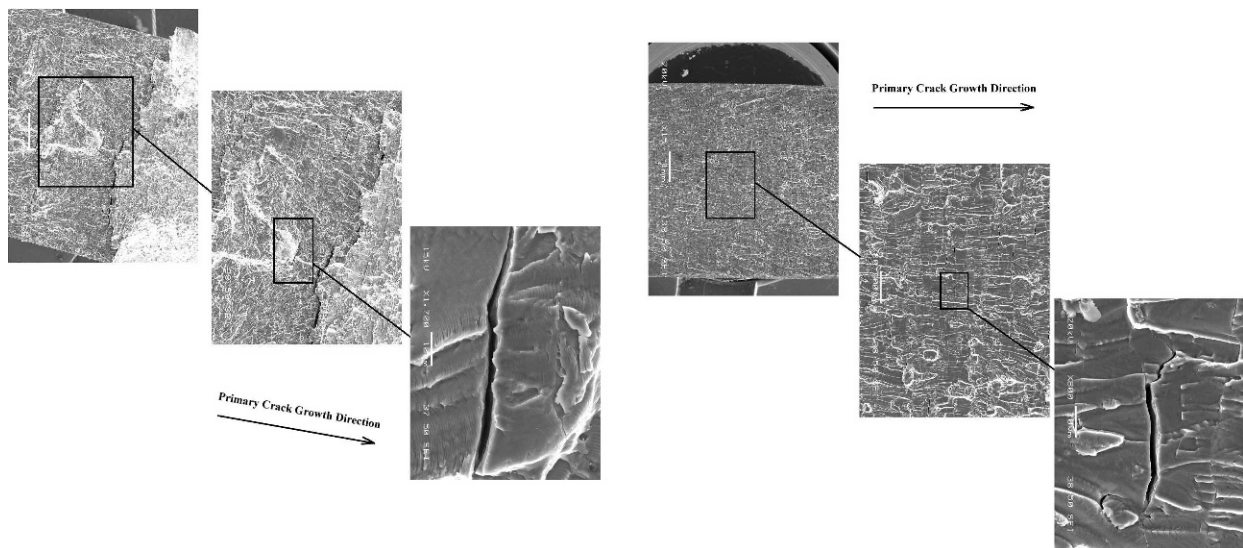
Crack progression and splitting in Longitudinal-Short (L-S)-oriented specimens.
